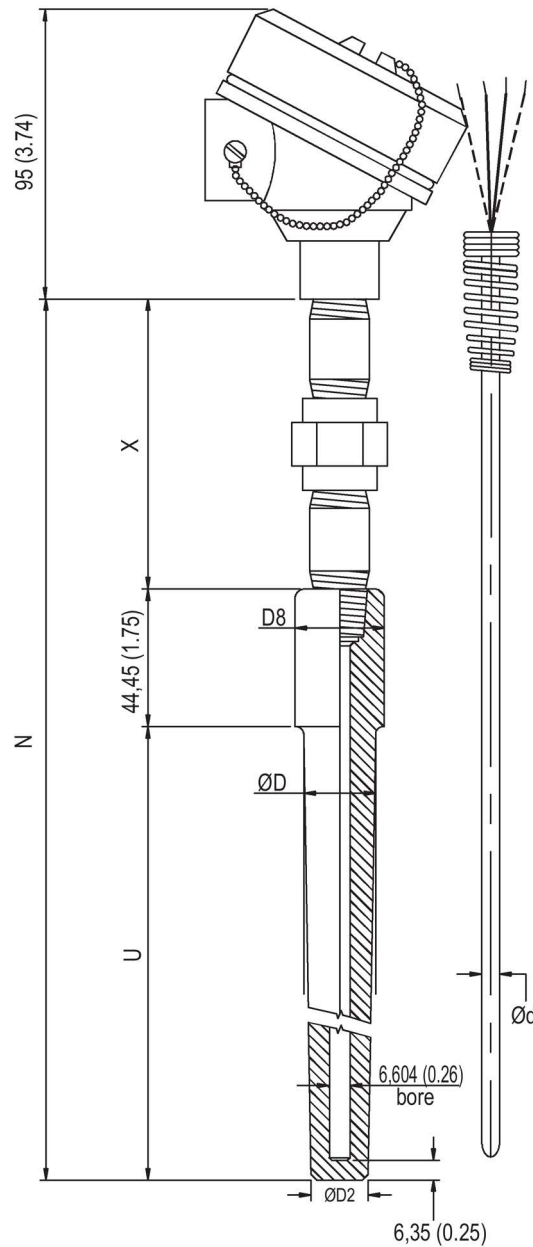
Dimensional drawings SITRANS TS500, type FR, flanged reduced well (7MC55...)
